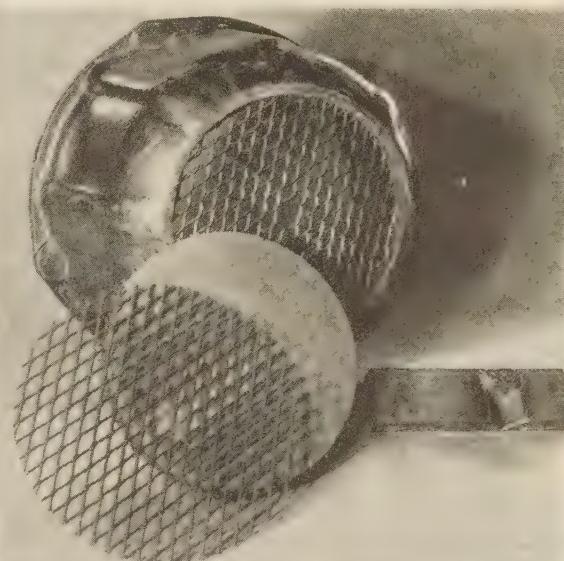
EXPANDED-METAL SCREEN BONDED IN A CASTING
